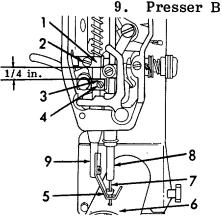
Presser Bar Assembly, Adjustment. END OF TASK
